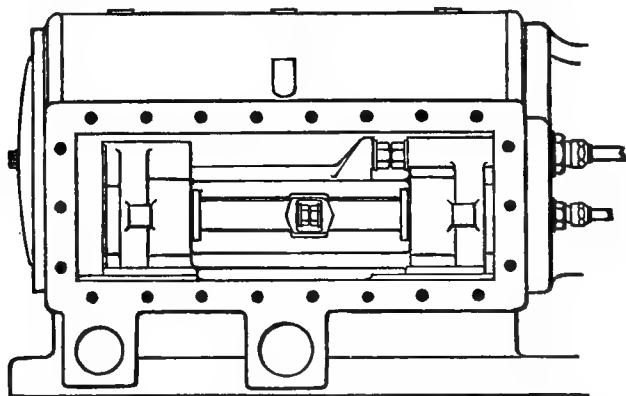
Side view of cylinder of Bonjour's engine, showing interior of steam chest.
